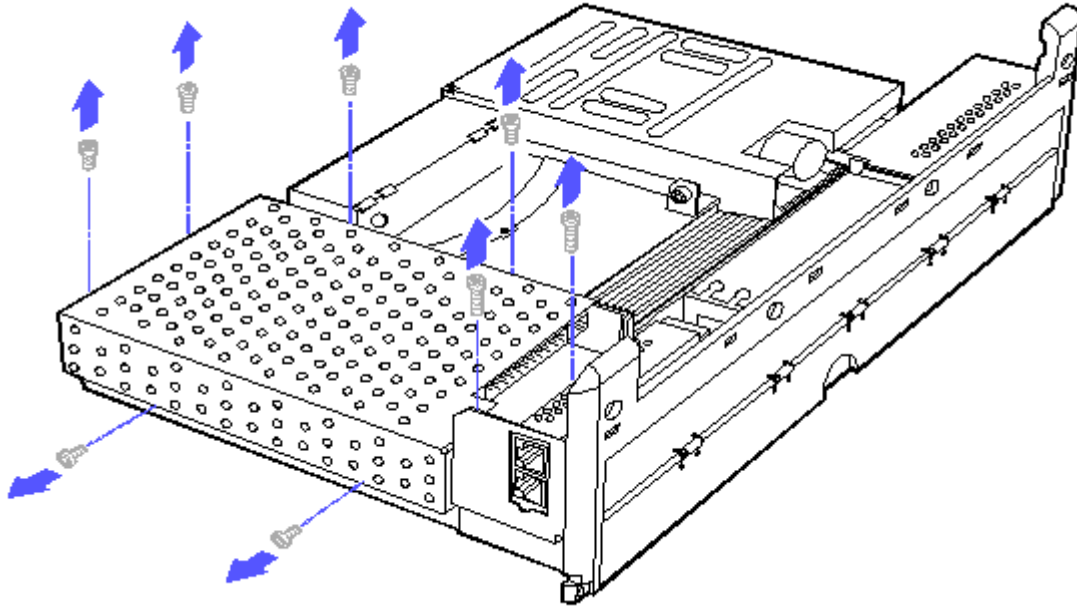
Removing the Screws from the Fixed Disk Drive Enclosure
